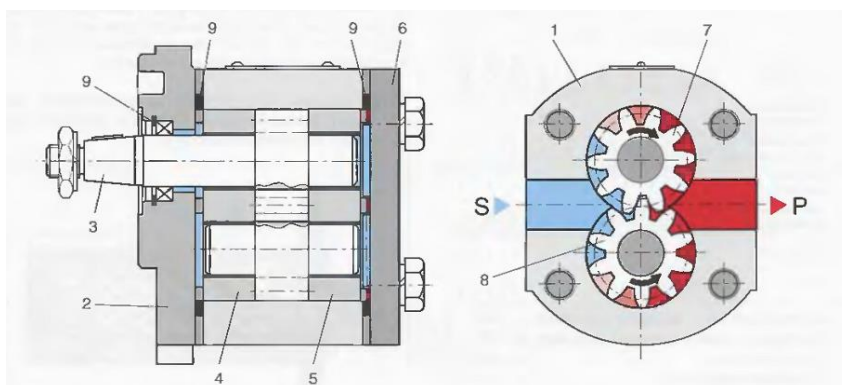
Design of a gear pump: 1- body; 2- front flange; 3 - drive shaft; 4 - front support bushing; 5 - rear support bushing; 6 - rear flange; 7 - a leading gear wheel; 8 - drive the gear wheel; 9 - sealing rings
